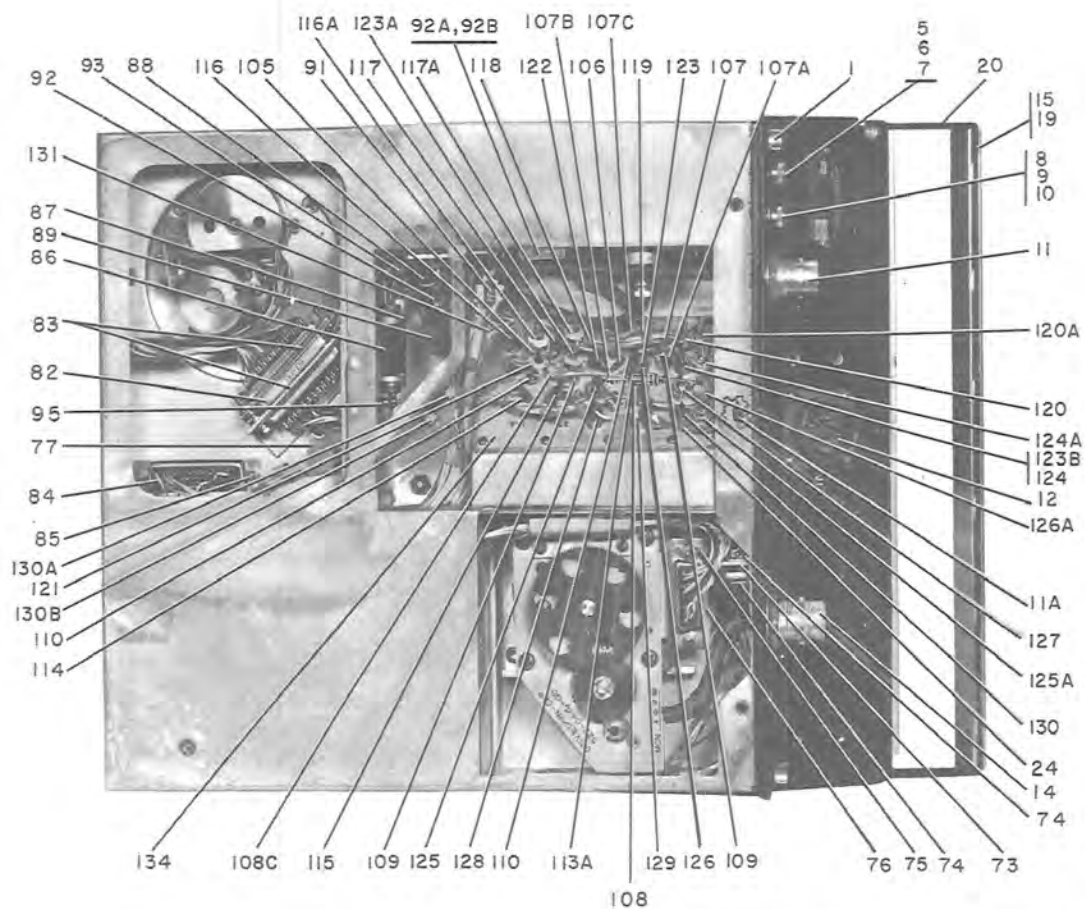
Electrical Equipment Chassis (Sheet 1 of 2).
